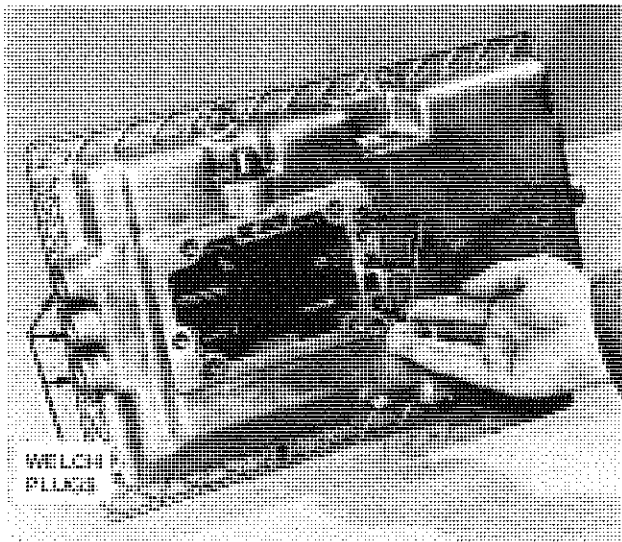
Assembling Poppet Balls, Springs and Welch Plugs
